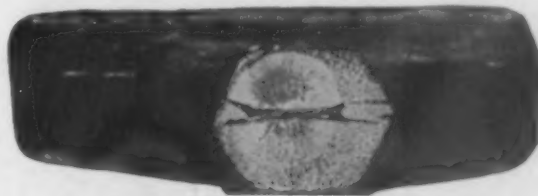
Full size photograph showing the end of the shank of a pneumatic tamping bar which had broken from an exterior "detail" crack and welded with a "V" weld which developed in service the interior transverse fissure shown from the imperfect welded portions. The unwelded surface in this case is regarded similar in effect to the longitudinal crack with its serrations of the coalescent type of induced interior transverse fissures found in rail heads
